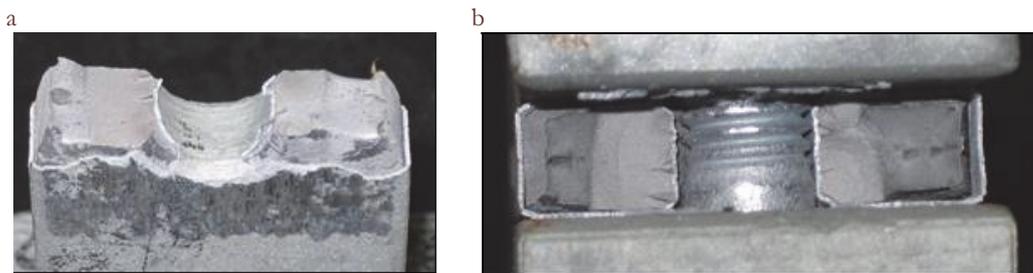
Typical fracture surface after cyclic loading. (a) Plate and (b) bolted part.
